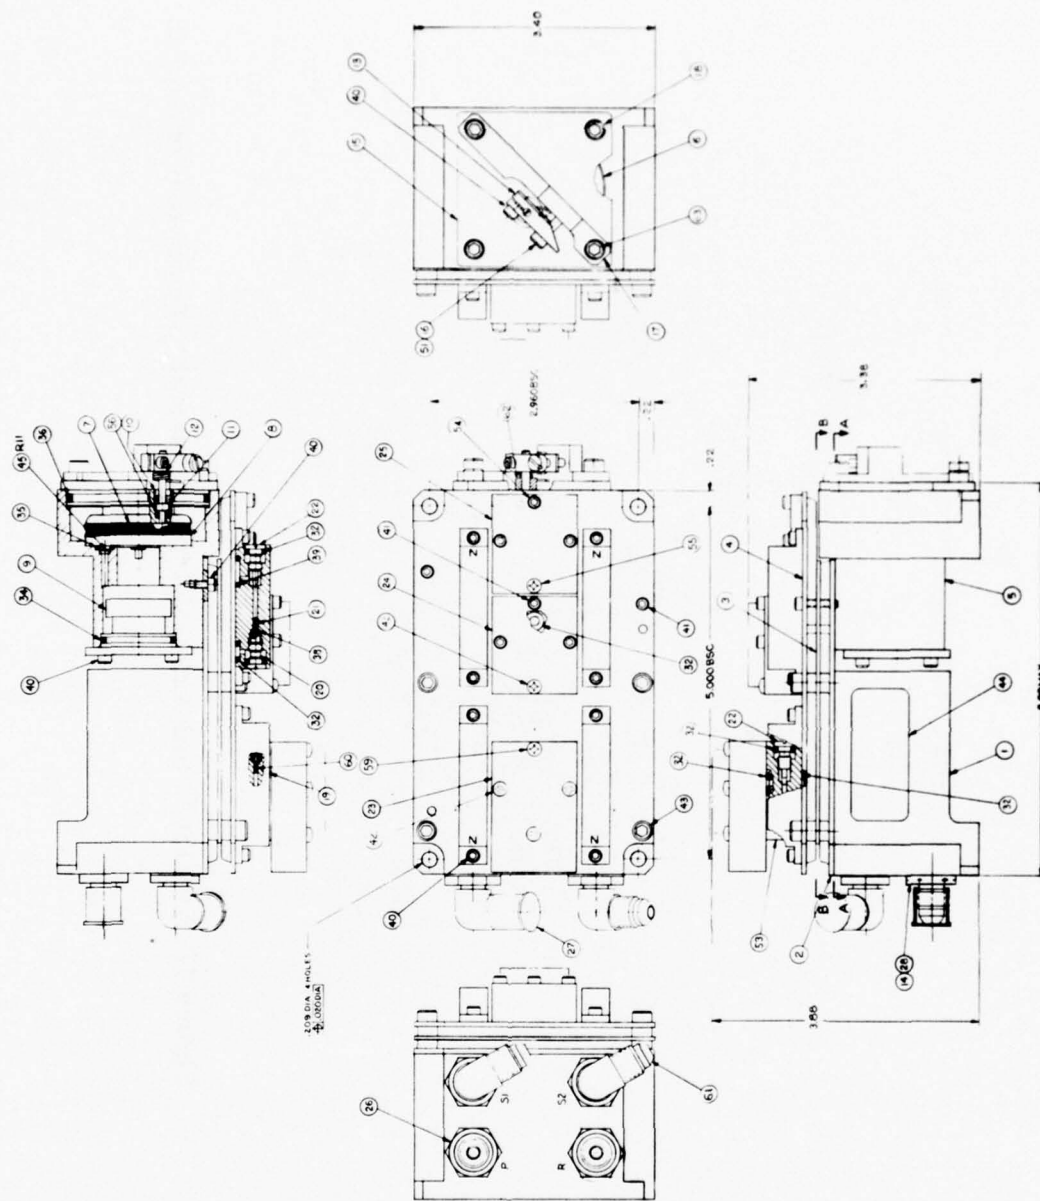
YG1136A Roll Axis Controller Assembly Drawing.
